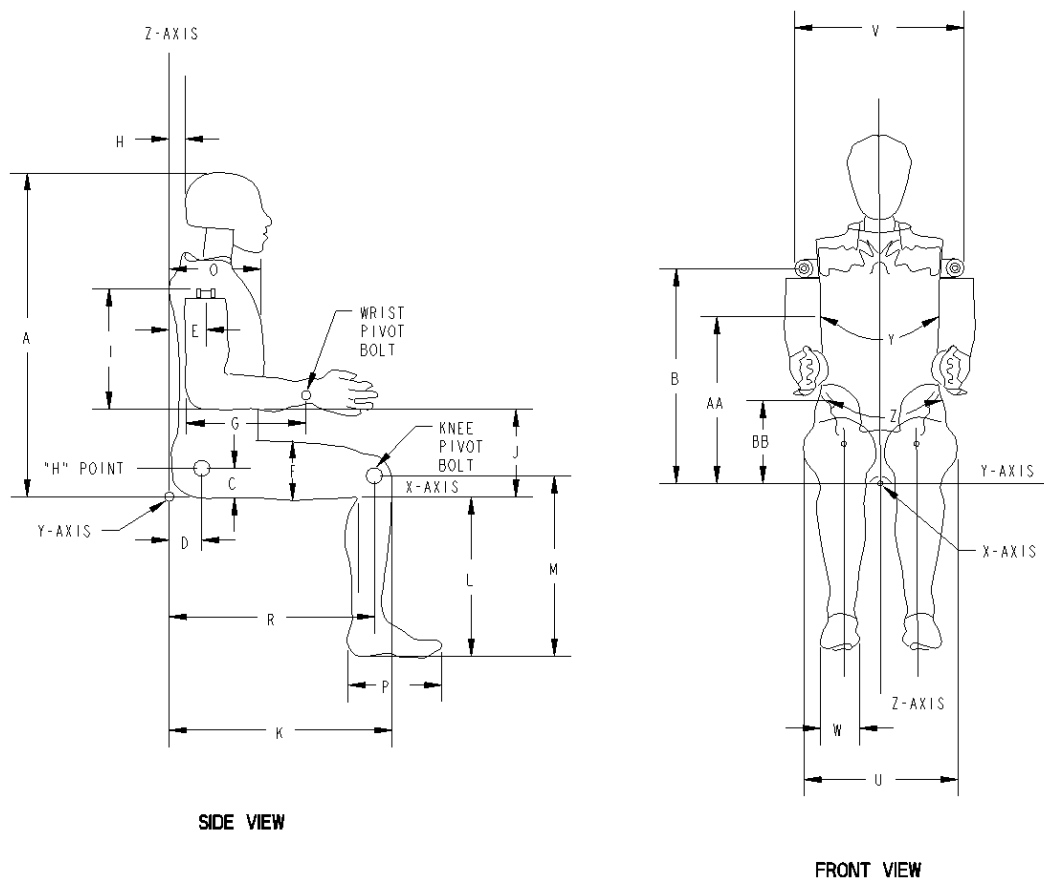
EXTERNAL DIMENSION MEASUREMENT
